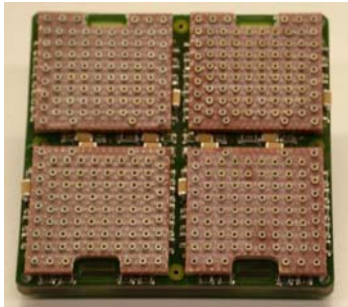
/a: a micro-cell base-board prototype equipped with BGA sockets
